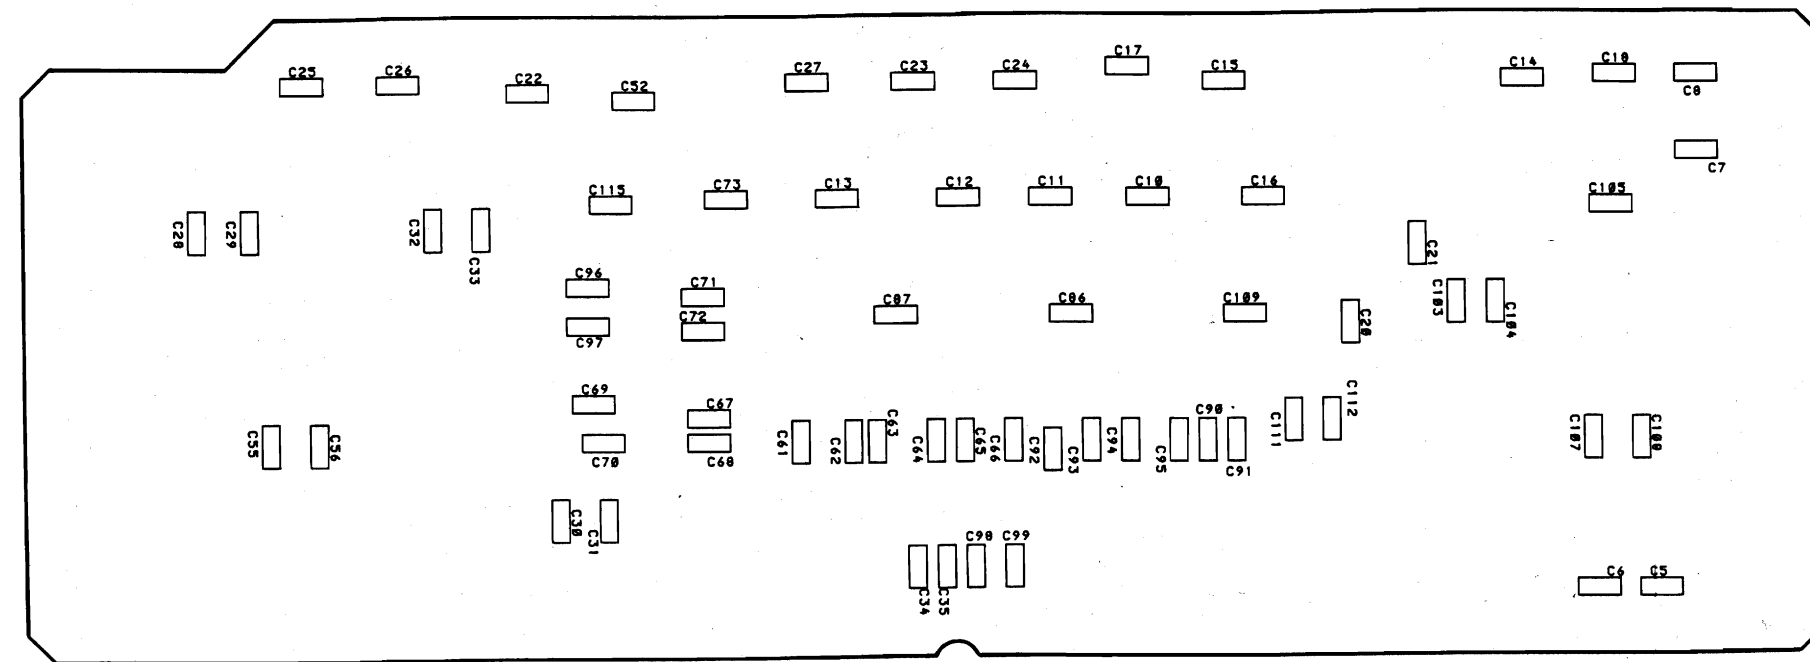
(2/2) A2-A12 MODULATION PC-Board Parts Layout (Pattern Side) 14
